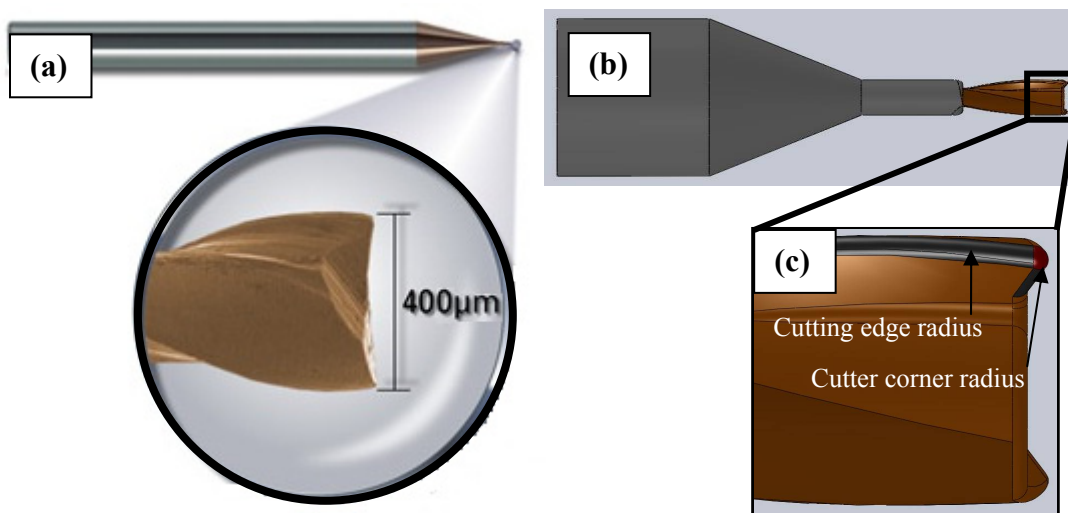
Micro-end mill tool (a) real tool, (b) and (c) 3D model of the cutting tool.
